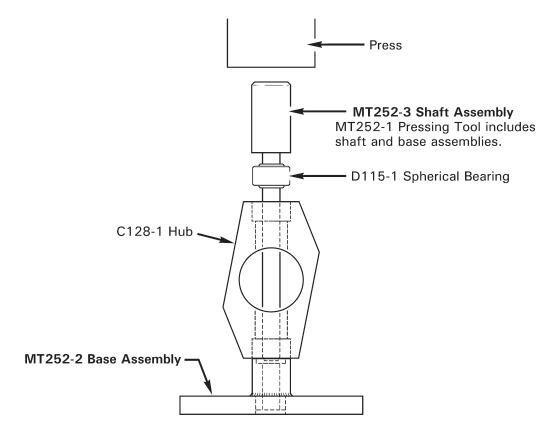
SPHERICAL BEARING INSTALLATION
